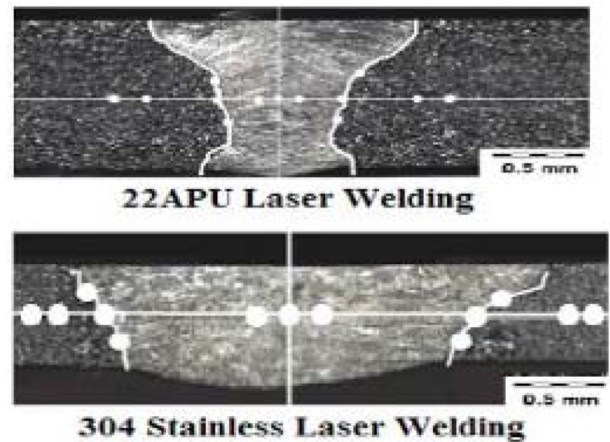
Cross section view of test specimens of 22 APU and STS 304 with Laser welding
